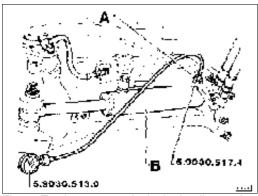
Testing pressure in the hydraulic steering circuit.
